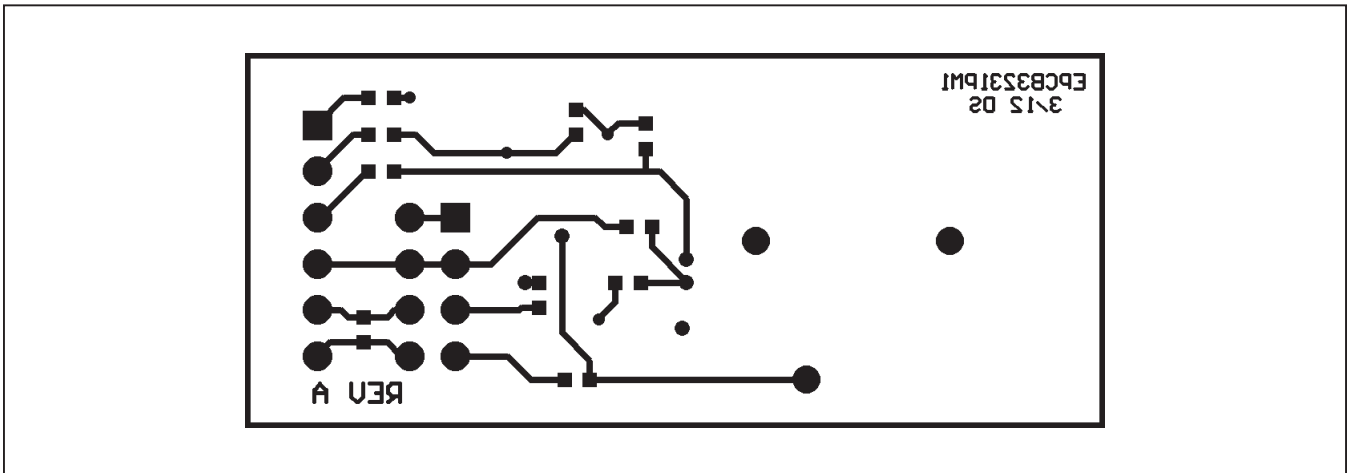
DS3231MPMB1 Peripheral Module PCB Layout—Solder Side
